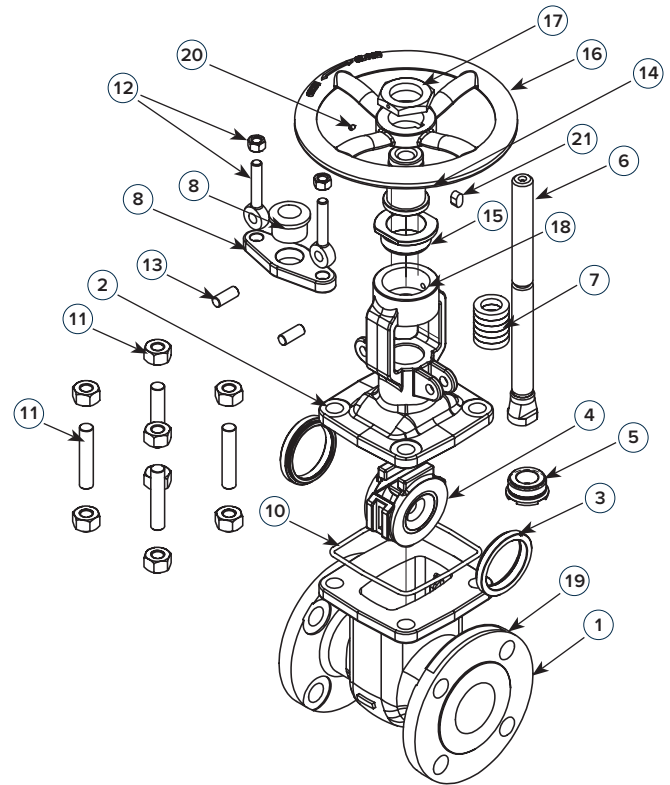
XX - 46XX - 47XX - 55XX - 56XX - 57XX FLANGED GATE, GLOBE & CHECK VALVES
